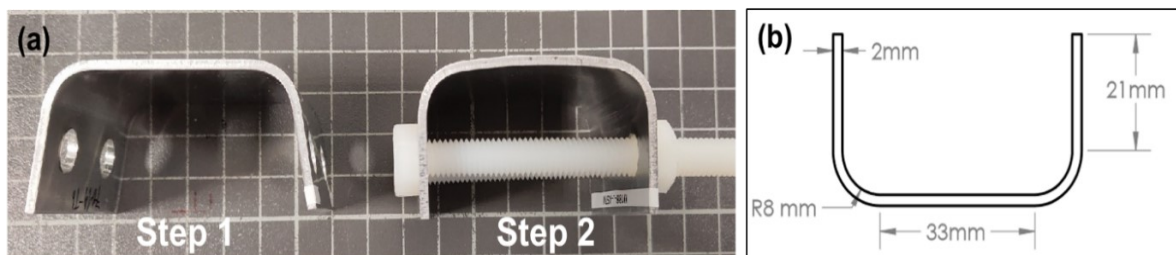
(A) TWO-STEP BENDING PROCESS OF KS-8 SPECIMEN (B) FINAL DIMENSIONS OF THE KS-8 BENT SPECIMEN
